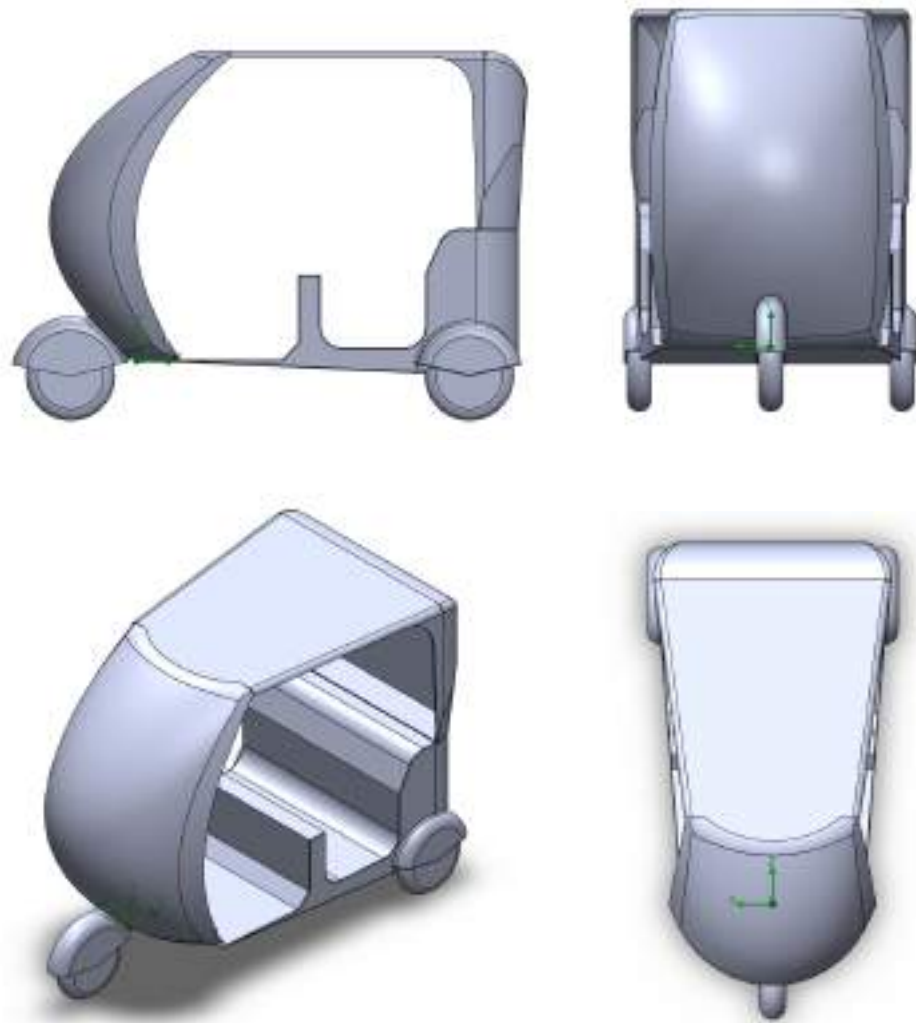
Side View, Fig 6.6 Front View, Fig 6.7 Isometric view, Fig 6.8 Top View [Revised design (From top left)]
